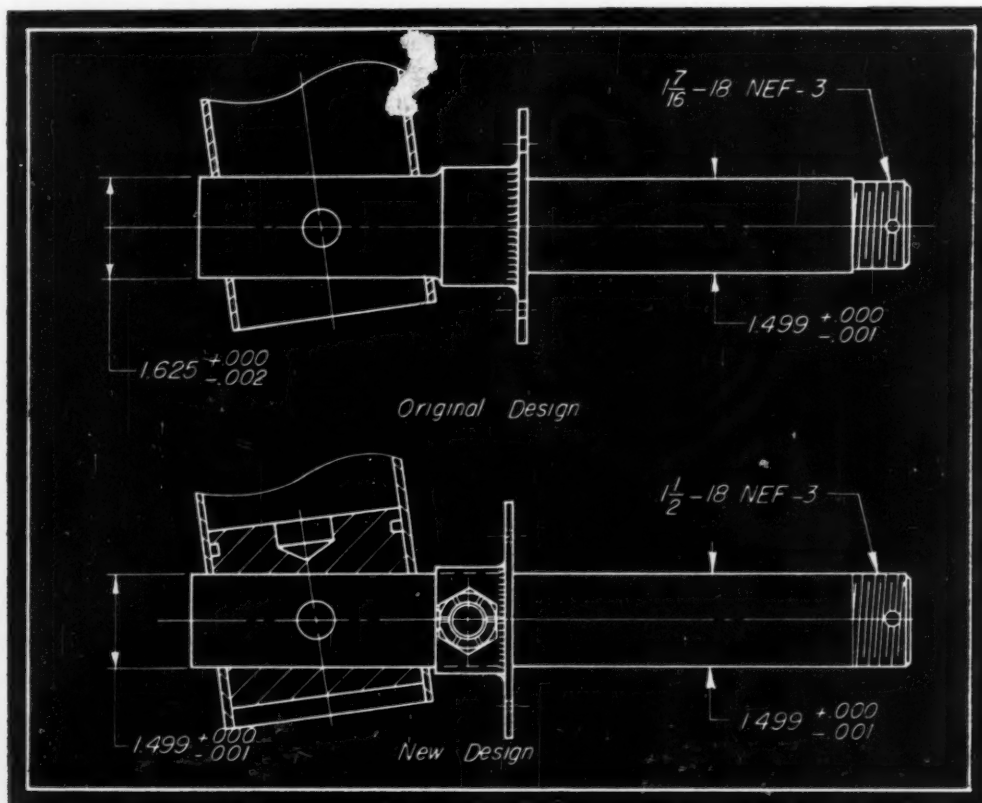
Left—Original landing gear axle with welded flange required 0.77 man-hours to machine while the new design, in two pieces, required but 0.44 man-hours to complete
